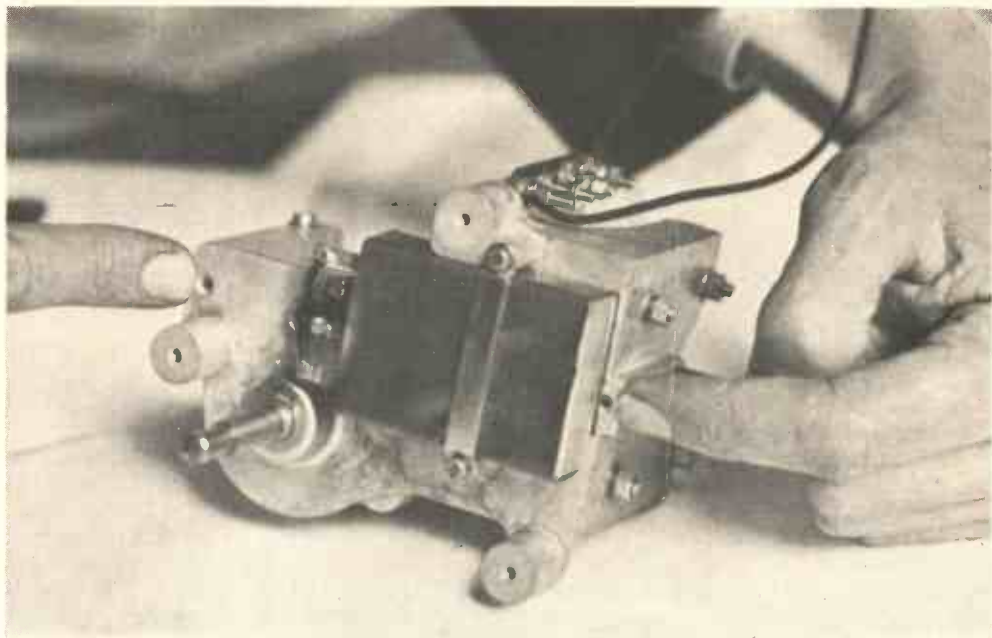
THE OILING POINTS FOR THE END BEARINGS.
